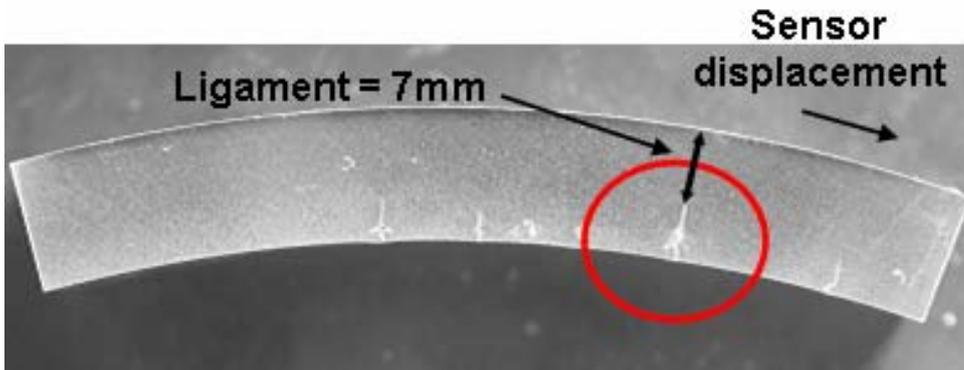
Transverse section of the 316L pipe affected by cracking and crazing induced by thermal fatigue.
